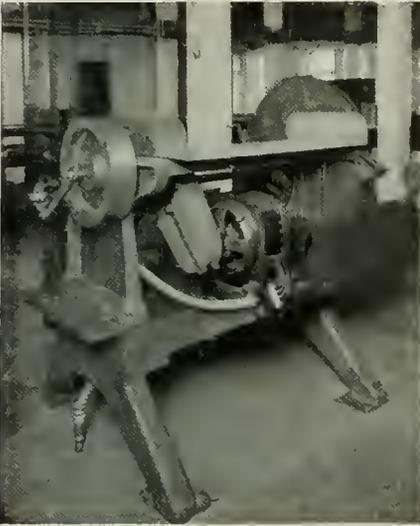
Dried Beef Slicing Machine Driven by Induction Motor in a Cannery
